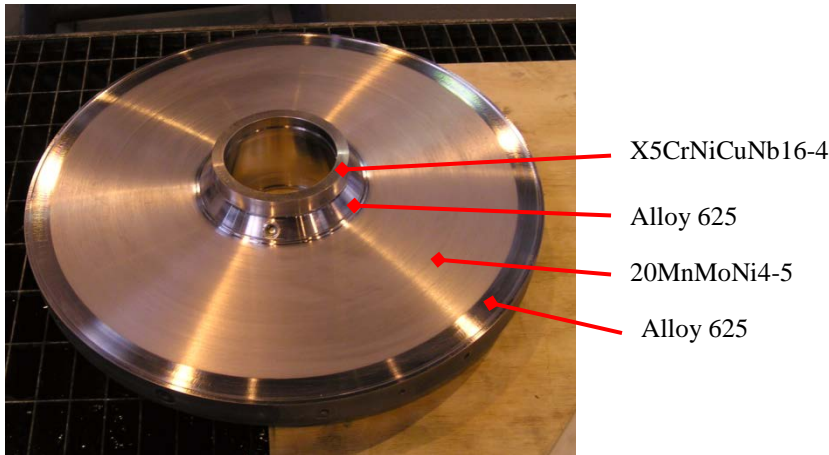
Hybrid thrust disk prior covering with thermal sprayed Alloy 625
